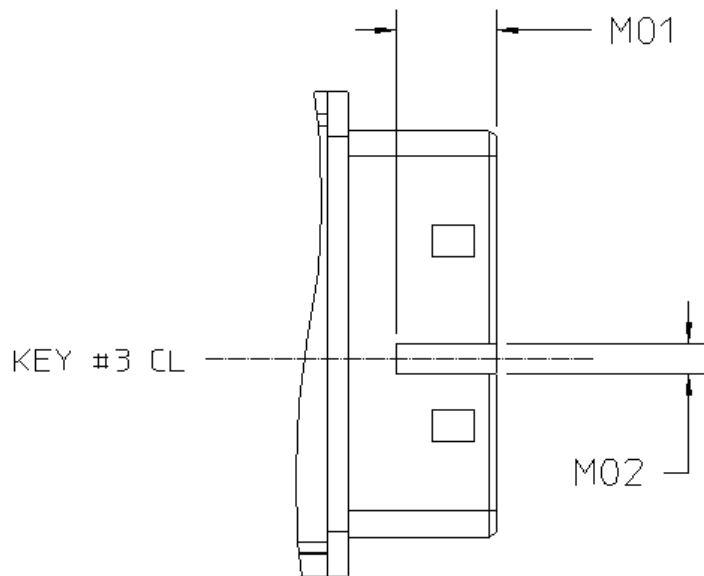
SHELL KEYWAY DIMENSIONS
